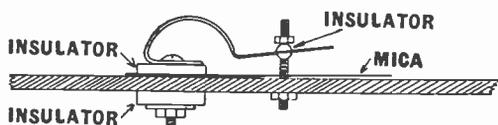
A trimming condenser of the type which utilises the chassis as one of its plates.
